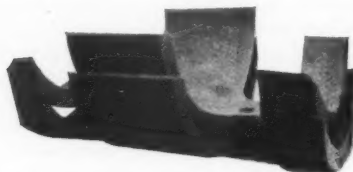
JACKET CORES VENTED WITH WAX WIRES.
